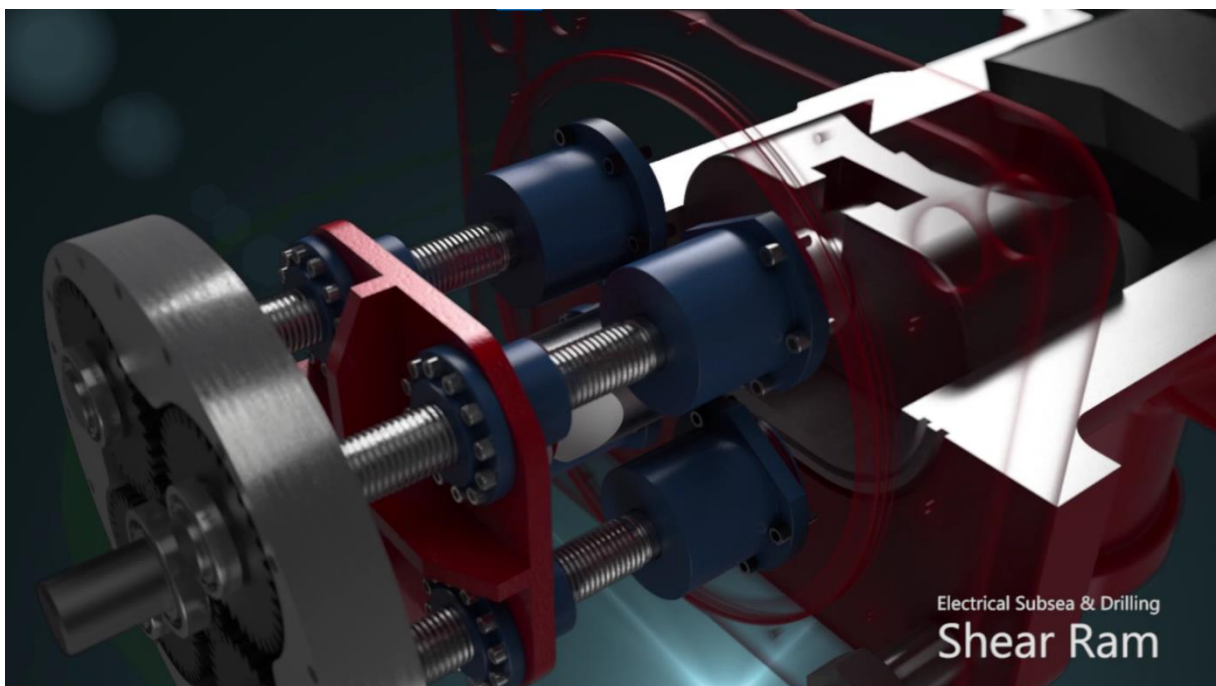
Transfer of the Torque from the Gear to the Drive Shaft (Electrical Subsea & Drilling, n.d.)
